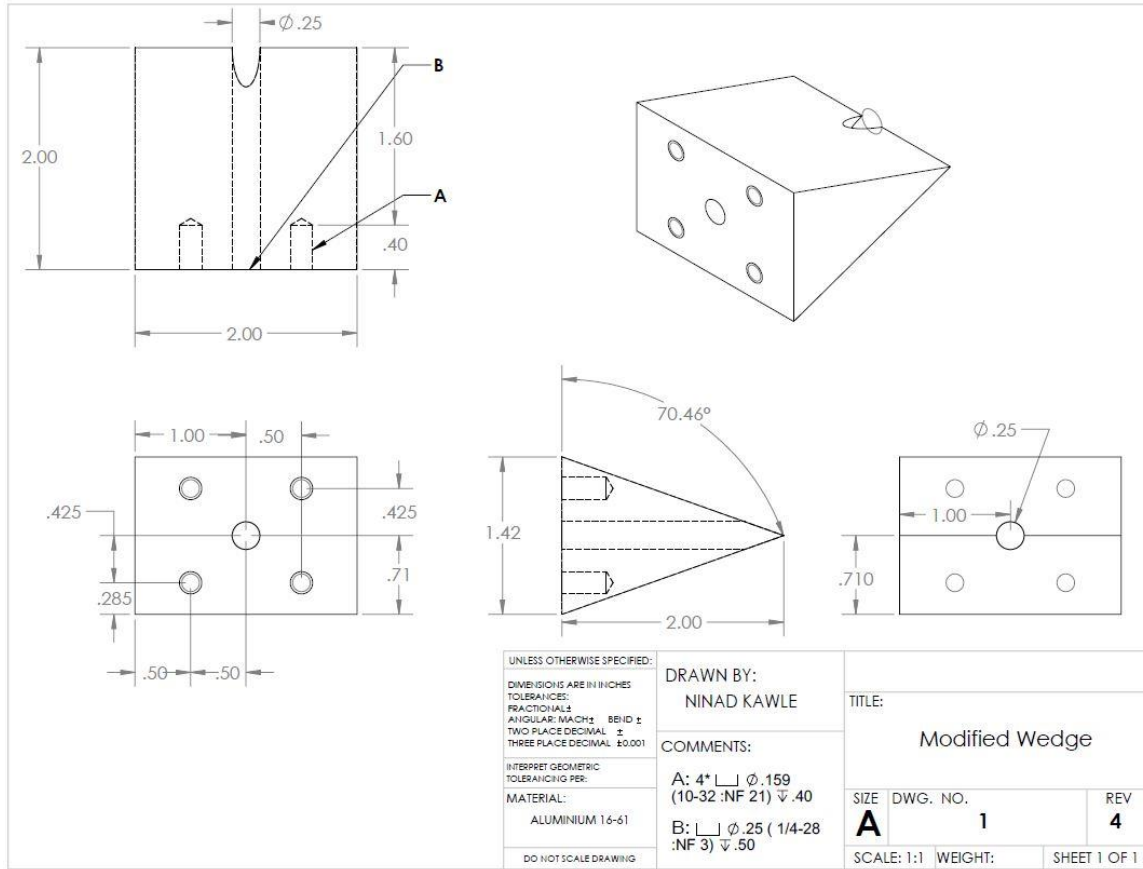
CAD drawing of the wedge which houses the stagnation tube
